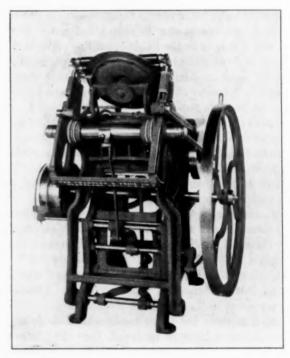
Details Brought out and Shadows Avoided by Preparation of Machine Parts Before Photographing
